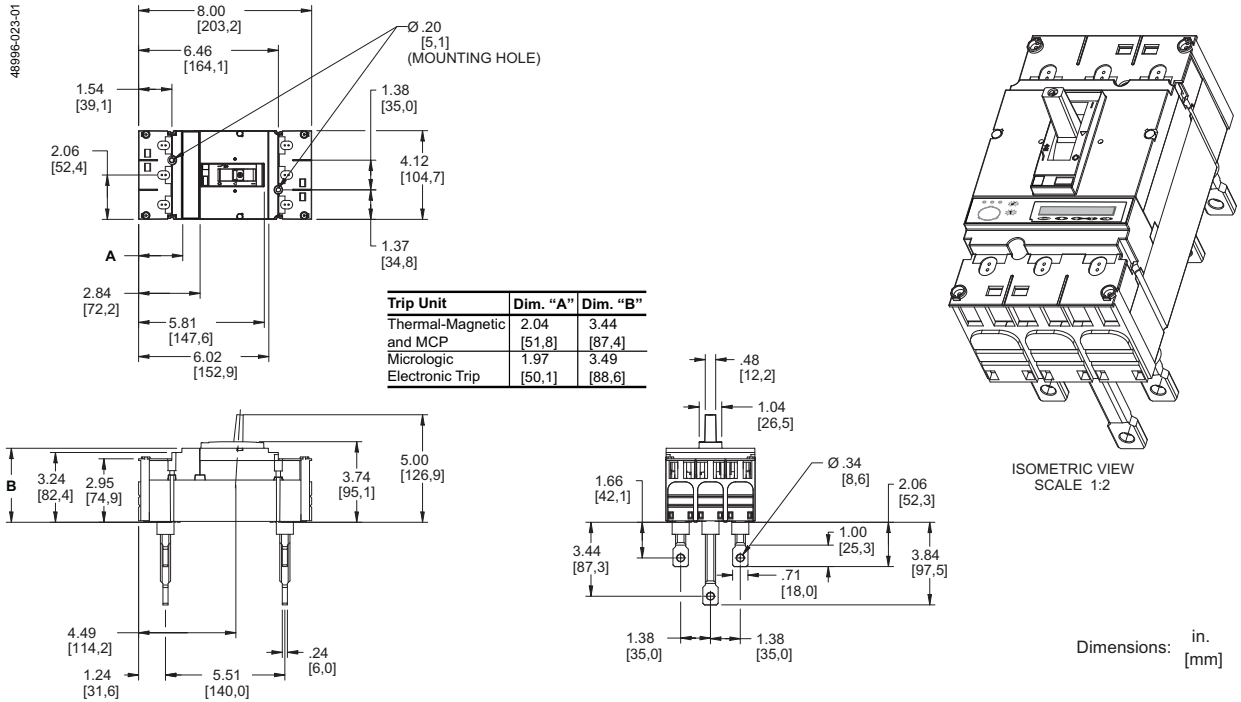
Motor Operator Detail (PowerPact J-Frame Circuit Breaker)
